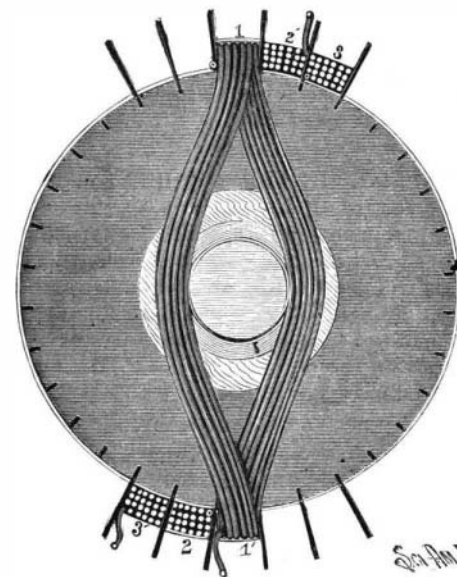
ARRANGEMENT OF THE LAYERS AT END OF ARMATURE CORE.
